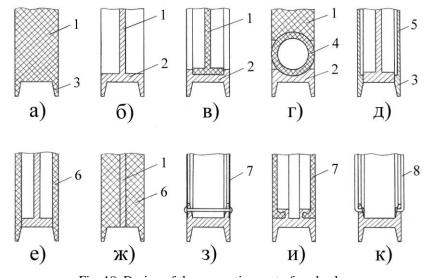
Design of the supporting part of a wheel: a), b) — solid (monolithic) wheel; c), d), h), i), j) — combined with a moving rim; e), f), g) — combined with moving flanges; 1 — wheel body; 2 — rim; 3 — flange; 4 — elastic toroidal component; 5 — flexible plate; 6 — flexible disk; 7 — membrane; 8 — spoke.
